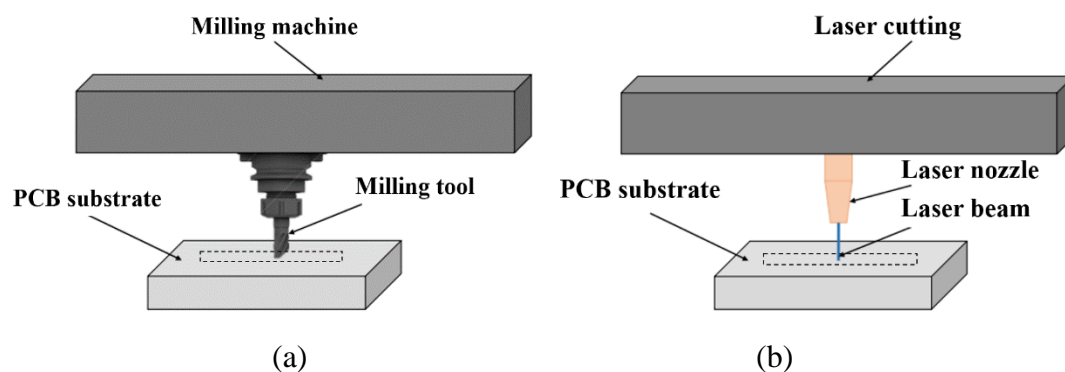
27. Schematic of (a) milling machine; and (b) laser cutting.
